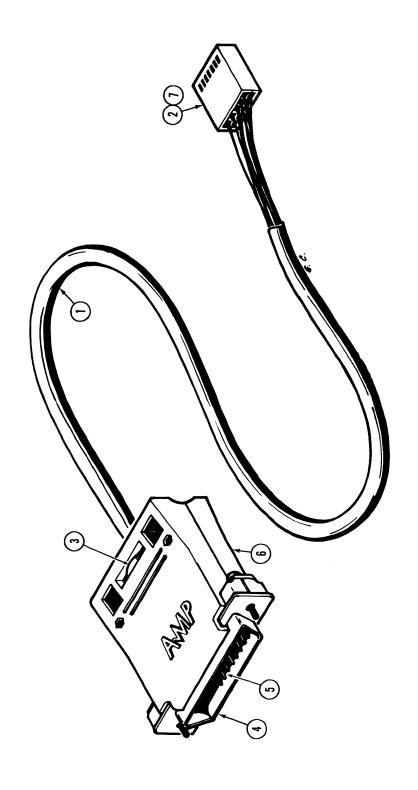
23730-01 EIA CABLE ASSEMBLY, COMMON 23939-01 EIA CABLE ASSEMBLY, FOXBORO
